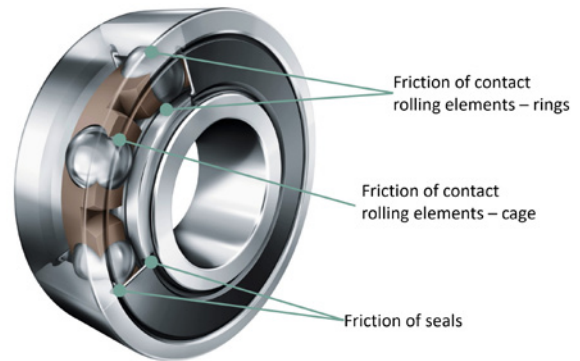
Frictional contacts in a typical radial deep groove ball bearing.
